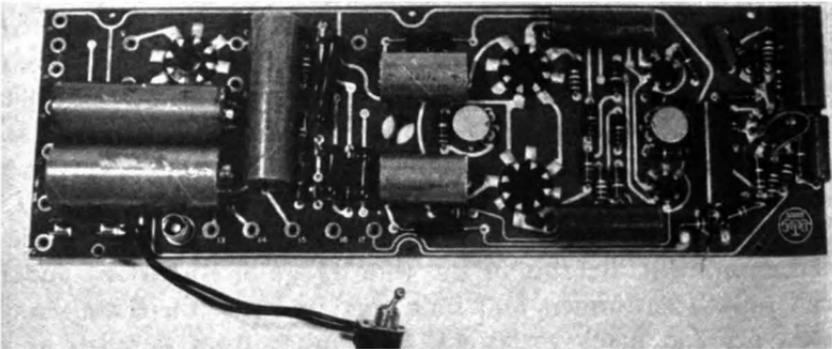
Etched board with assembled components. Courtesy Photocircuits Corp.
